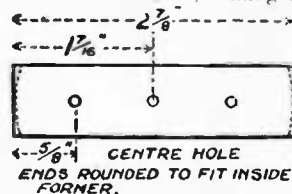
Two strips should be cut, as shown, to fit into the top and bottom of the coil.
